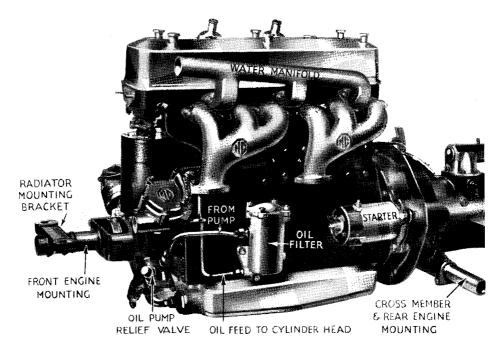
Illustration No. 6.—Near-side of the engine removed from the chassis, showing various oil ways and the radiator and engine mounting.
